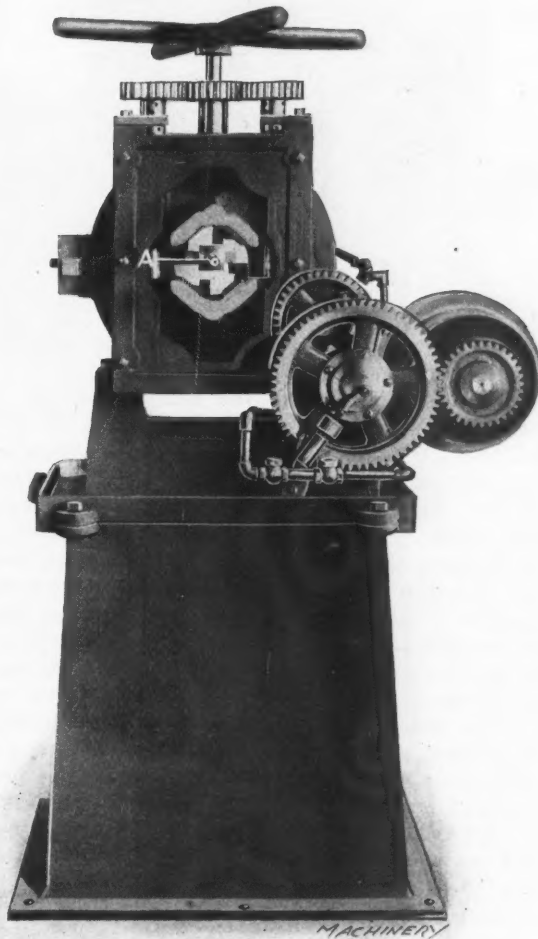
Operating Side of Machine, showing Length Stop which locates Work in Vise
